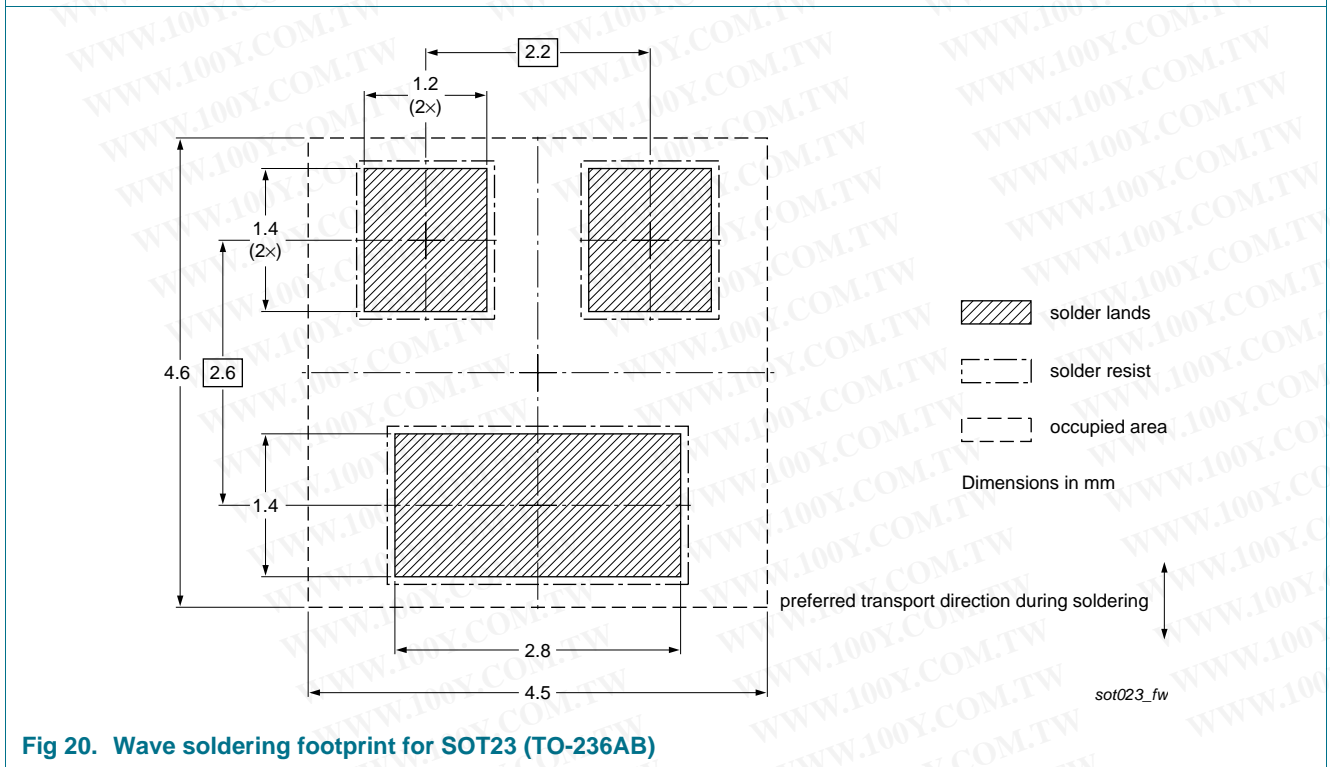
Wave soldering footprint for SOT23 (TO-236AB)
